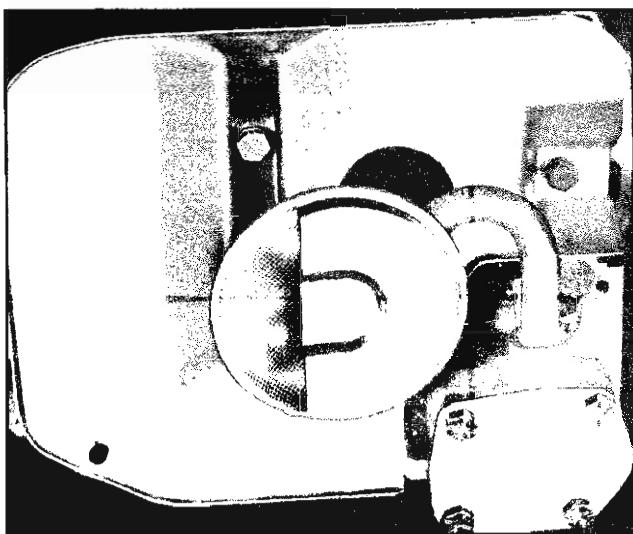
A-5 Oil Pump and Intake for 4 Cylinder Engine
